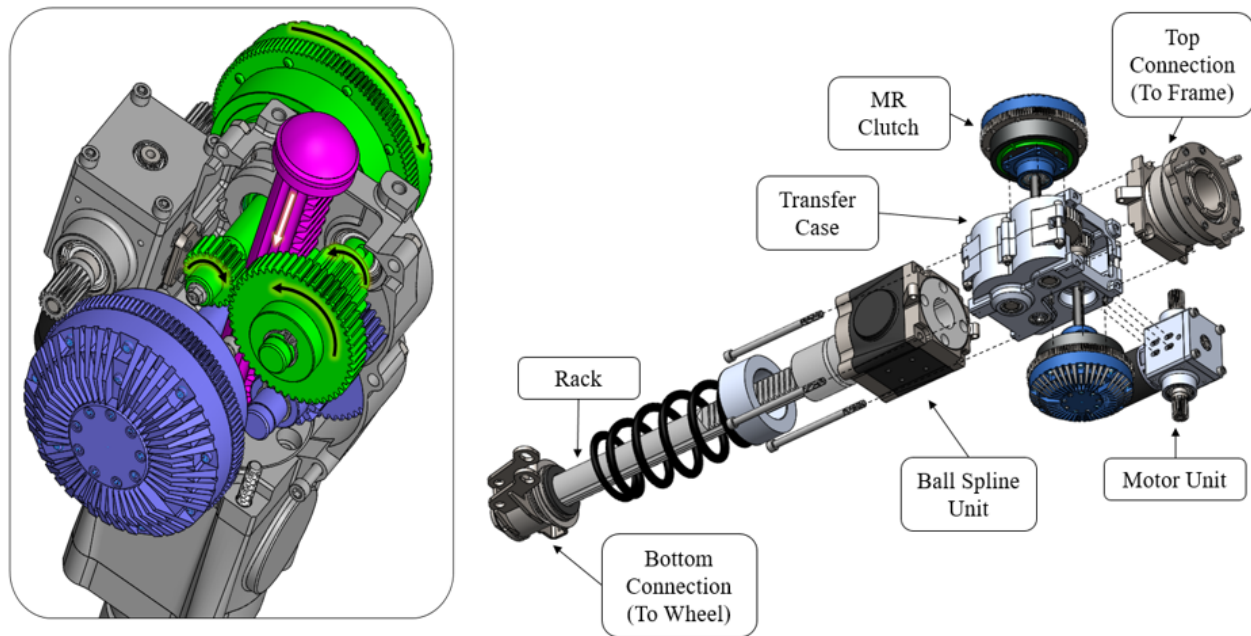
(a) Inside View of the Transfer Case and Gearing. (b) Exploded View of the Main Sub-Assemblies of the Actuator.
